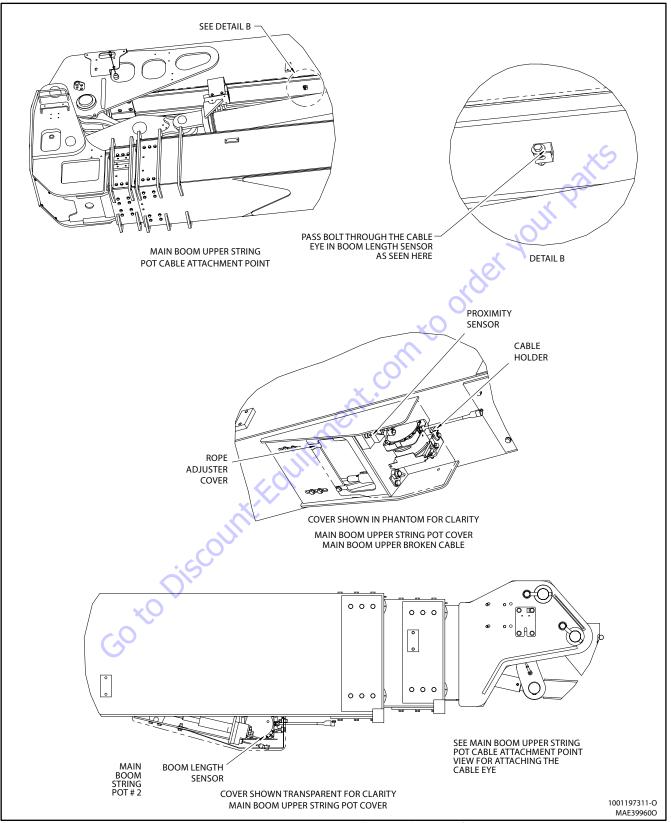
Boom Sensors Installation - Sheet 13 of 13
